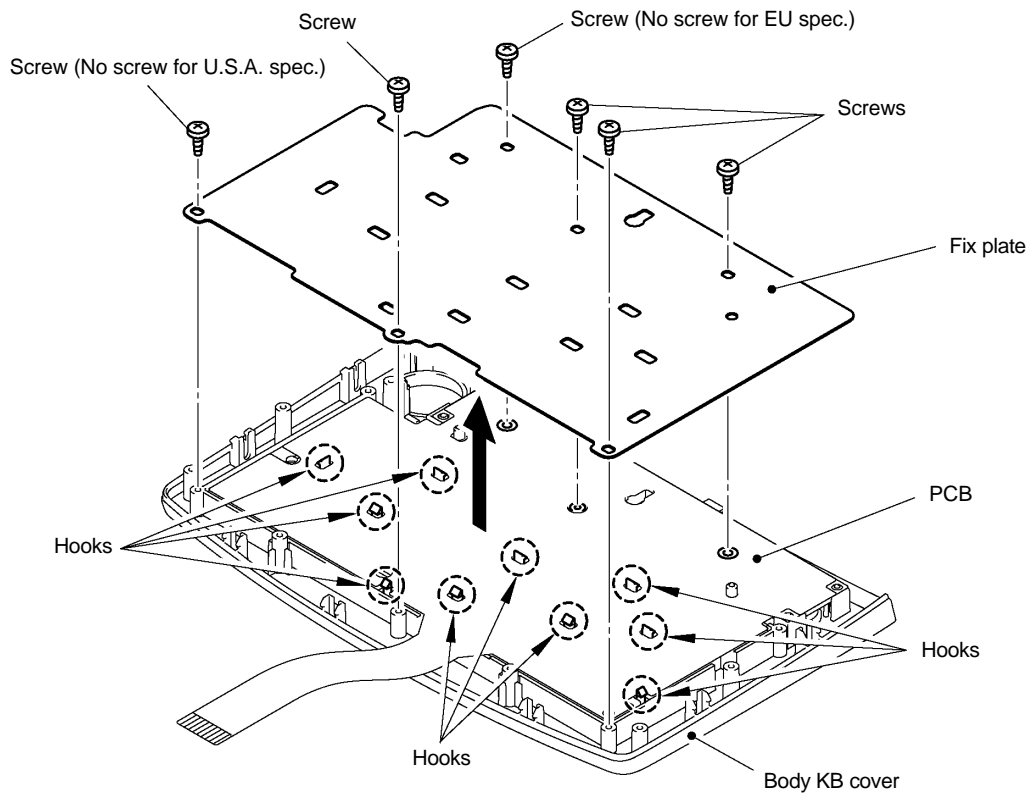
Disassembling the KB Unit/Rubber Key Unit (4)
